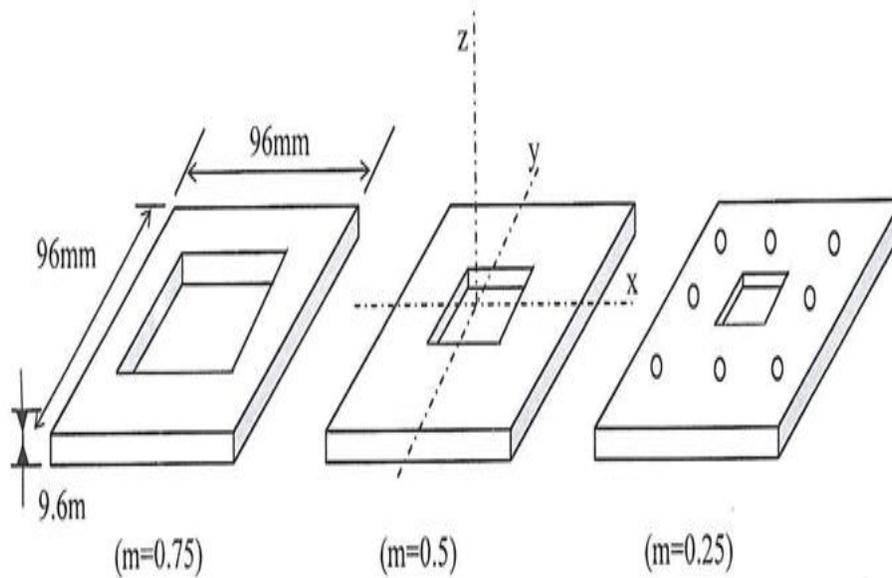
Dimensions of the three aluminum sheets used with holes for thermocouples.
